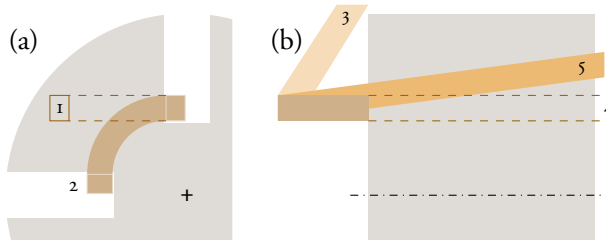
Illustration of winding tests with rotor design option 2 (here illustrated with a 4 pole rotor). (a) View from end of the machine, shaft center (+), natural bend angle for conductor (1), desired end winding after twist (2). (b) Side view, with conductor angle before being fit into next slot (3), maximum bend angle (4), angle after spring-back (5).
